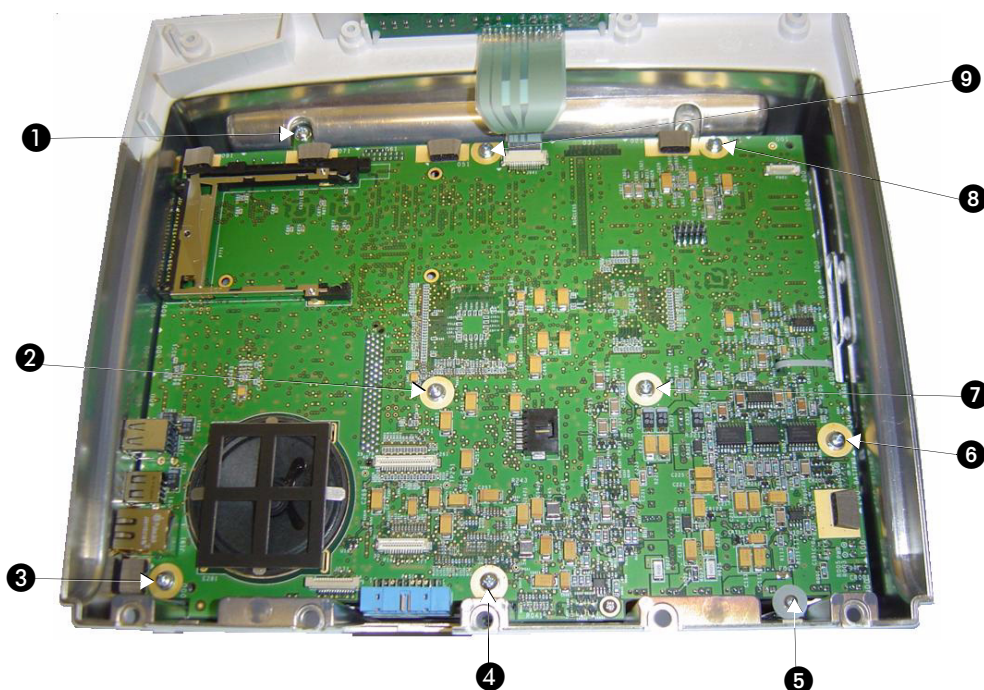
Nine screws holding the CPU PCBA to the chassis
